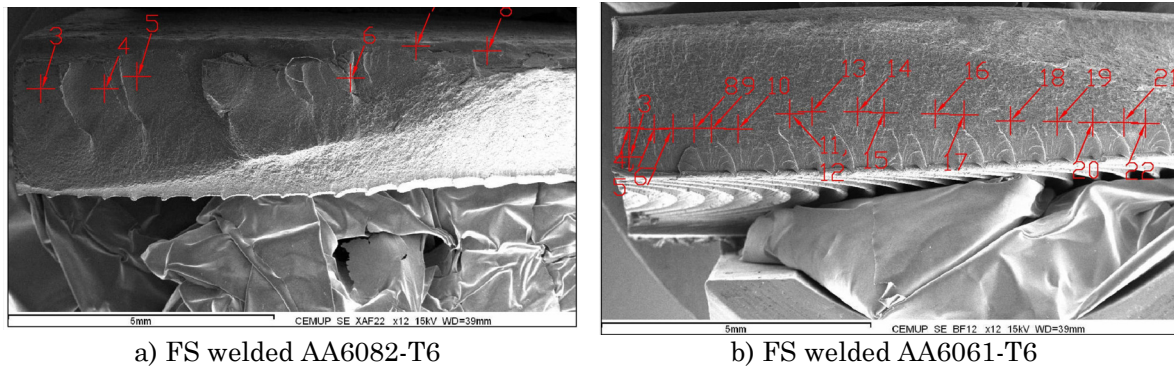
Fatigue crack of FS welded specimens, striation measurements sites.
